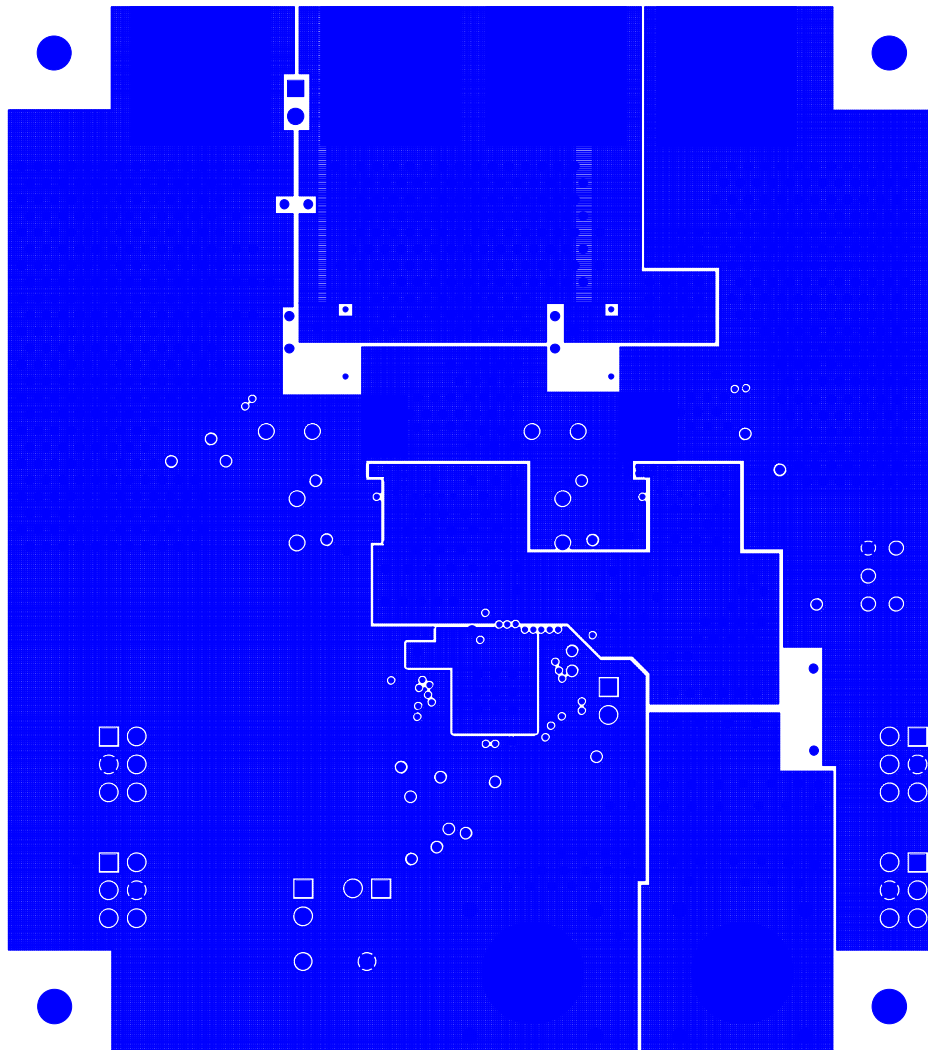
PCB - INNER LAYER 3 (TOP VIEW)
